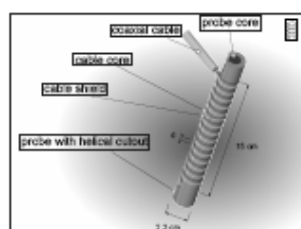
HSMP model - core and shielding of the coaxial cable run around a cylindrical (isolating) body. The shown model was constructed using SolidWorks and is used for simulations.
